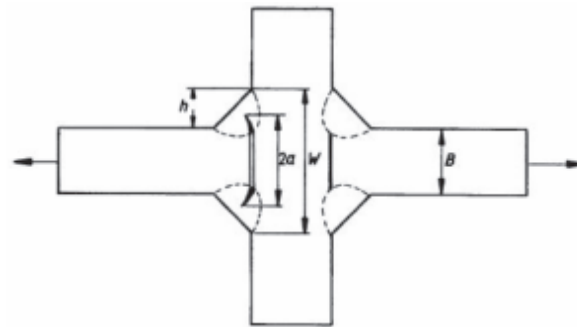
Crack and welded joint geometries (Fisher and Frank, 1979)
